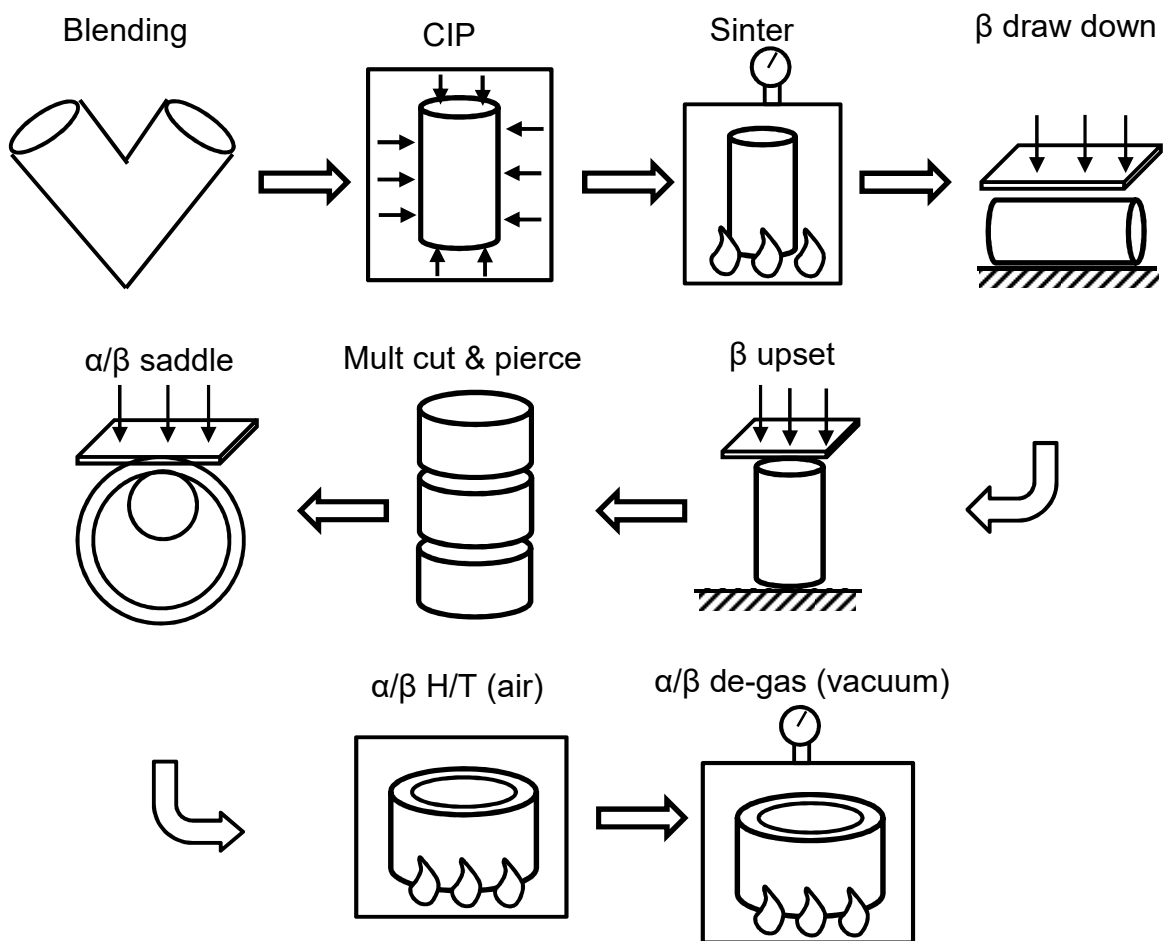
Powder billets for ring forging were blended, CIP and sintered. Billets were open die β upset and draw down forged over multiple passes. Billets were cut into mults and forged into a single ring. Forged rings were annealed then de-gassed to remove excess hydrogen.
